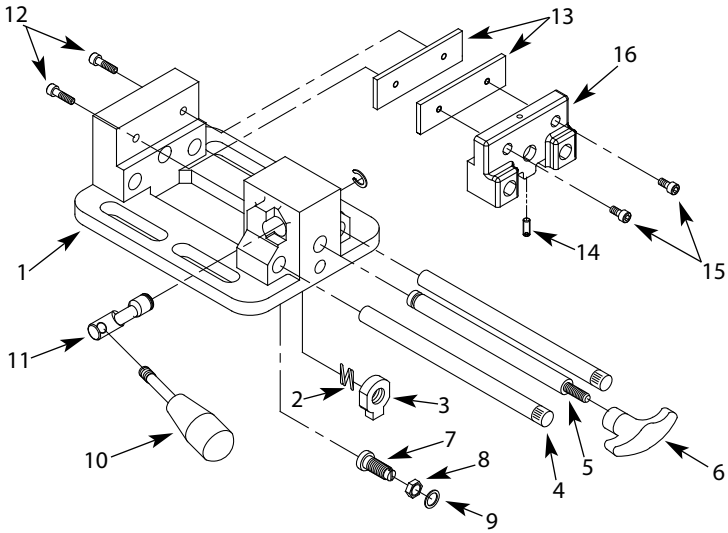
Replacement Parts Illustration for 3" Quick Grip/Release Vise
